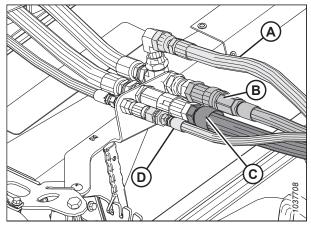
Windrower Hydraulic Hoses Connected to Header — View from Rear of Header
